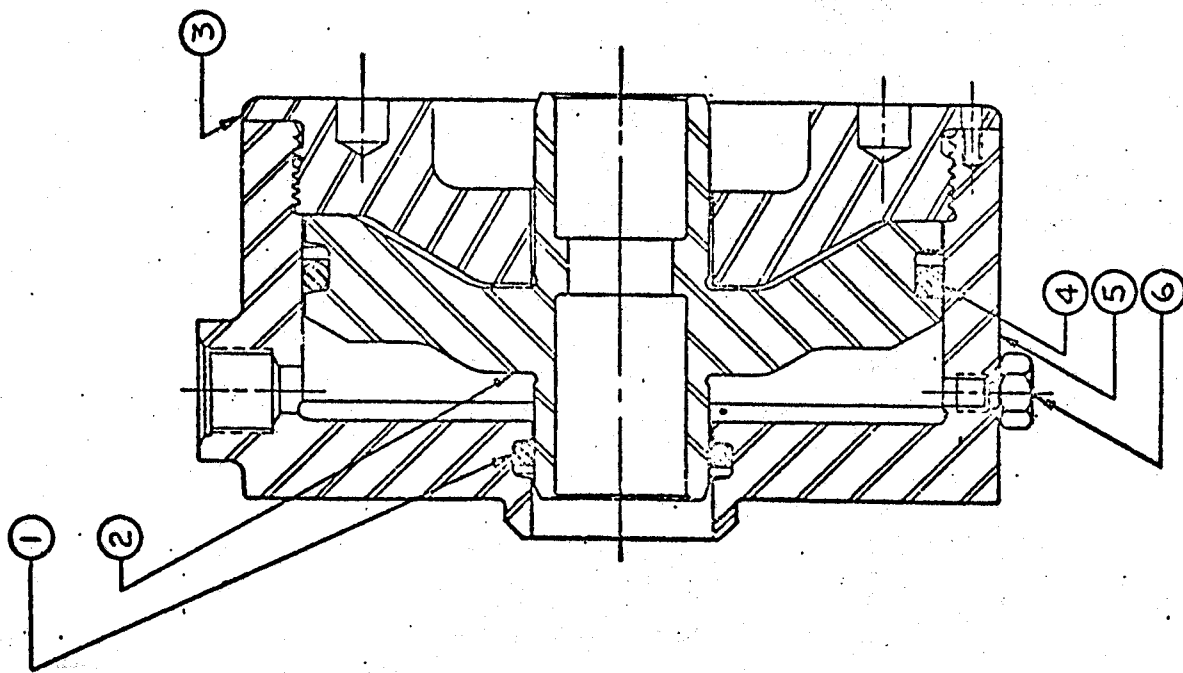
FIG. , BRAKE CYLINDER ASSEMBLY, 43494
